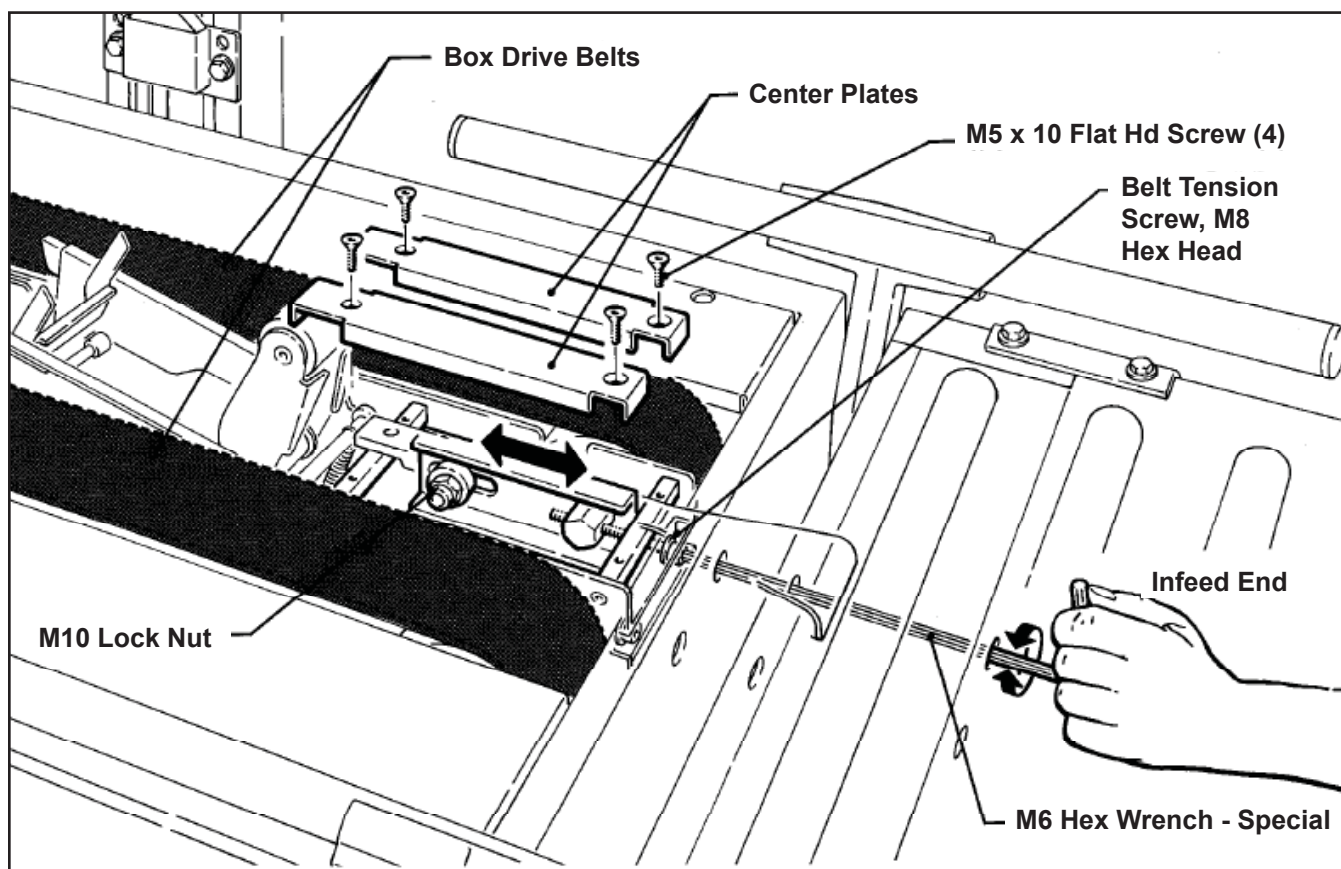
Box Drive Belt Tension Adjustment, Lower Belts (Infeed End)
